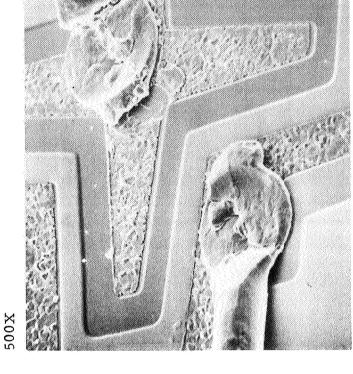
NA5-27473T (2N2222A), T.C. Wedge Bond, Die Side Bond, Microcracks at the Heel Before Power Cycling
